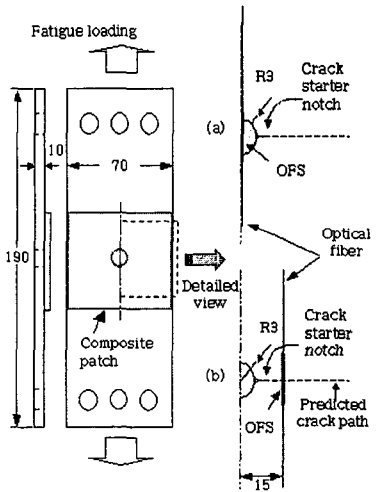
Dimensions of a center cracked tension steel specimen for the fatigue tests and attached locations of the TEFPI sensor. (a) TEFPI sensor attached below and (b) in front of the crack path.
